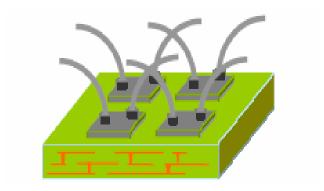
Manual attachment of tubes to the backside of each chip on a printed wiring board.
